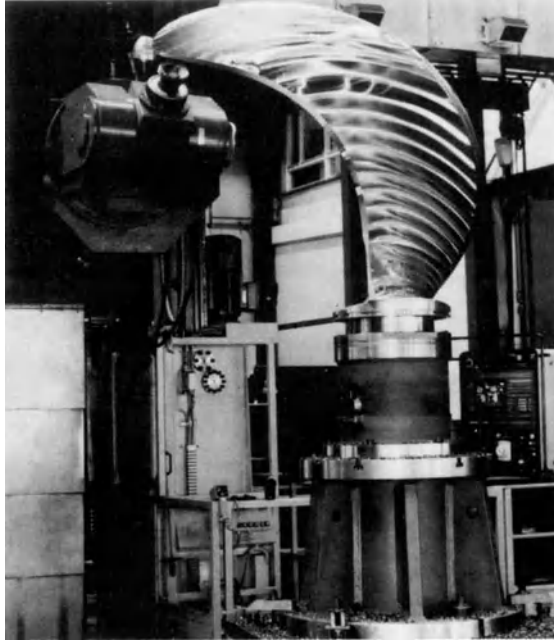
The complete machining of an impeller, by utilisation of a 5-axis horizontal machining centre in conjunction with a high-level programming language. The “sculptured surfaces” are produced with great form accuracy and at optimum metalcutting efficiency. [Courtesy of Scharmann Machine Ltd.]
